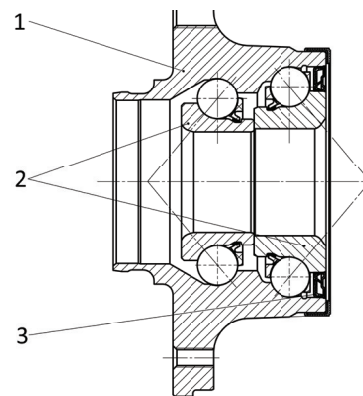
Generation II wheel hub unit based on the ball bearing design; 1 outer flanged ring, 2 inner rings, and 3 seal
